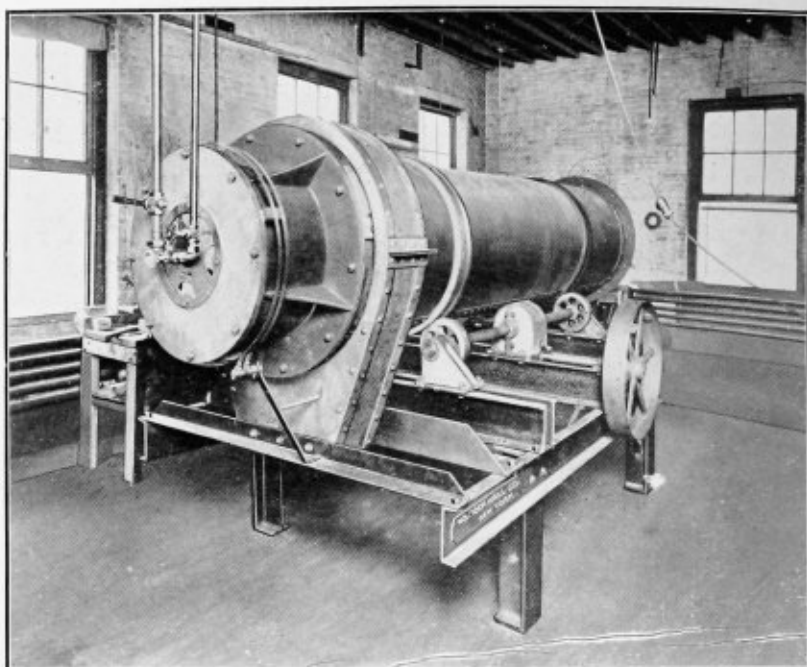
Rotary Annealing Furnace — Oil Fuel. Showing Firing and Discharging End.
